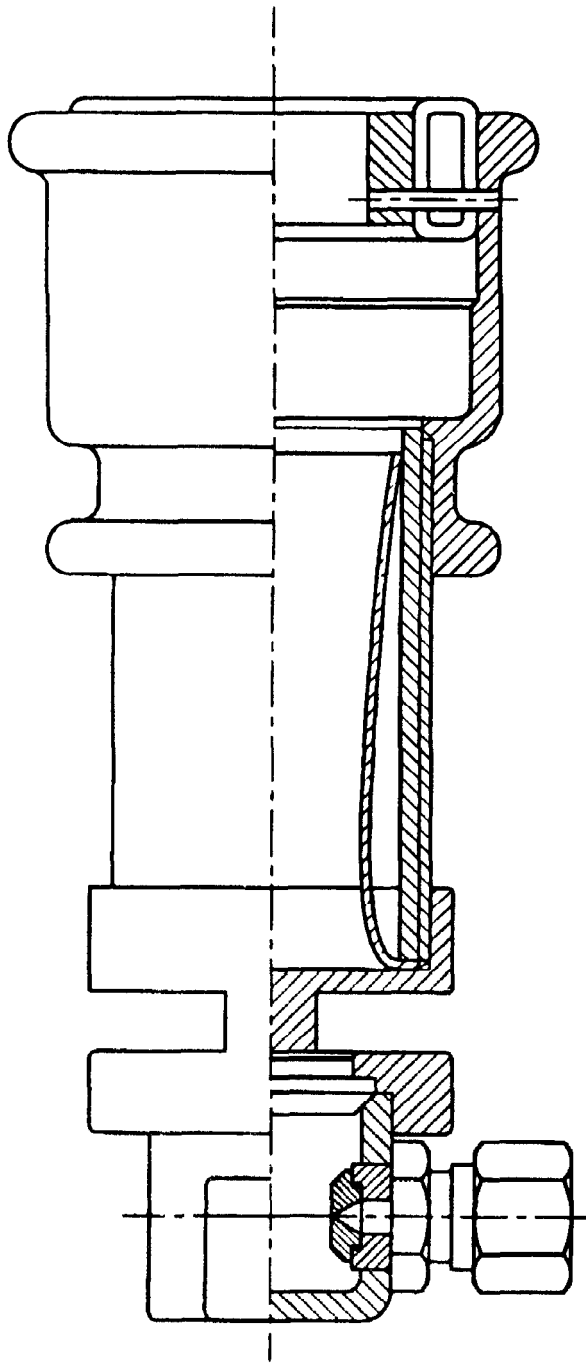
T-TYPE BURNER (ASSEMBLY)
